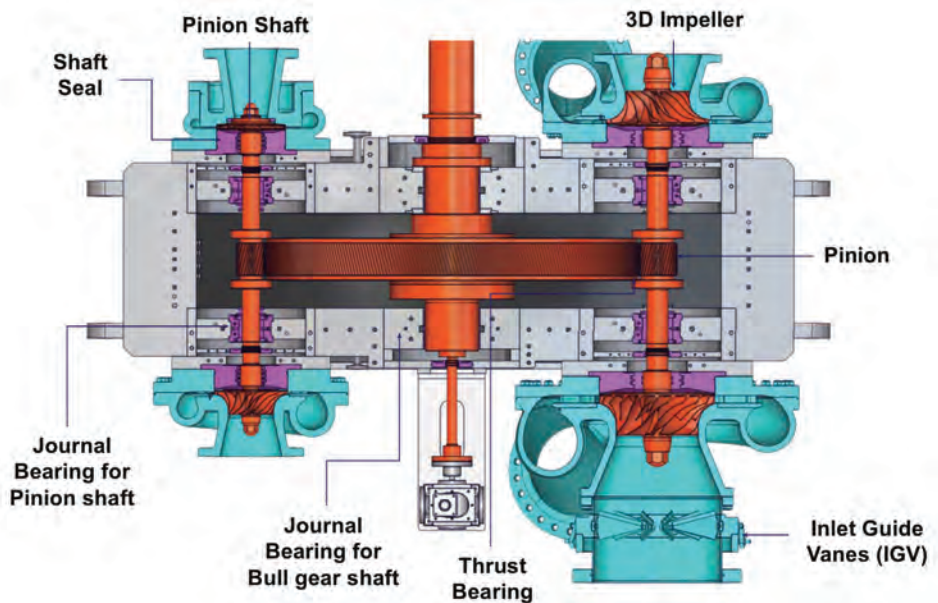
Cut-through details of the 6-stage integrally geared compressor shown in Fig. 6-66 [39].
